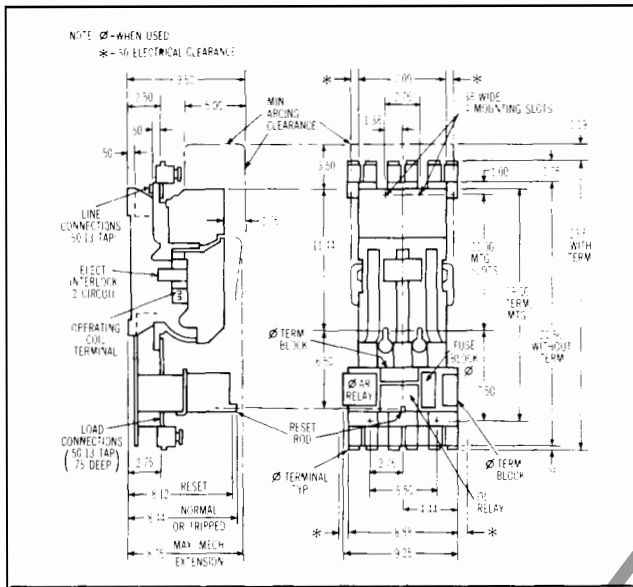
(From Dwg. 3496C85) Outline and Reset Rod Location for Overload Protection Assembly Mounted on Type GCA Size 6 Contactor.
